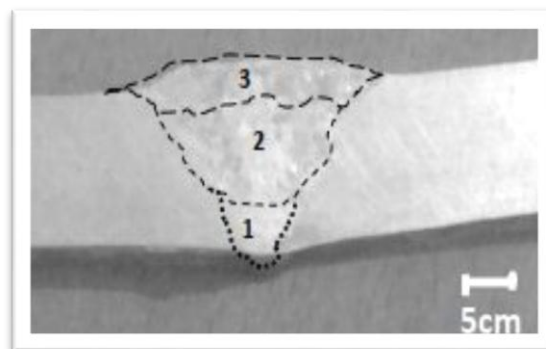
Macrograph and morphology of welded joint in AISI304L
